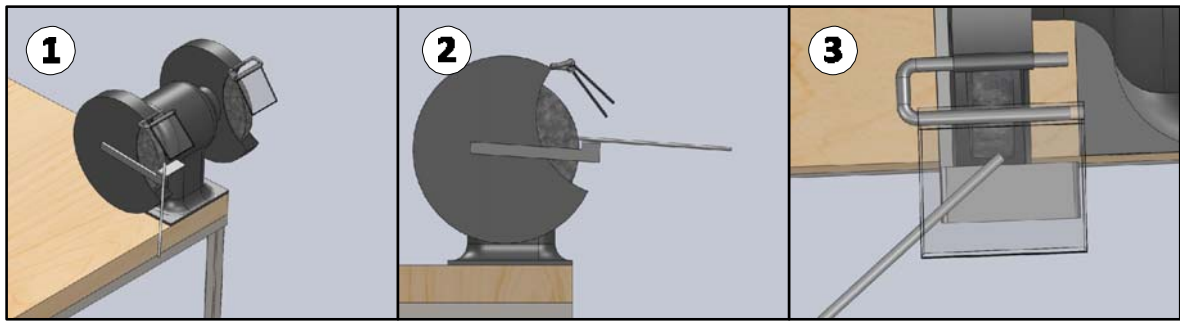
Removing burs with table grinder- (1) Place the rod on table of grinder. (2) Make sure the rod is flush with the table of the grinder. (3) Always look through the shield when using a table grinder.
